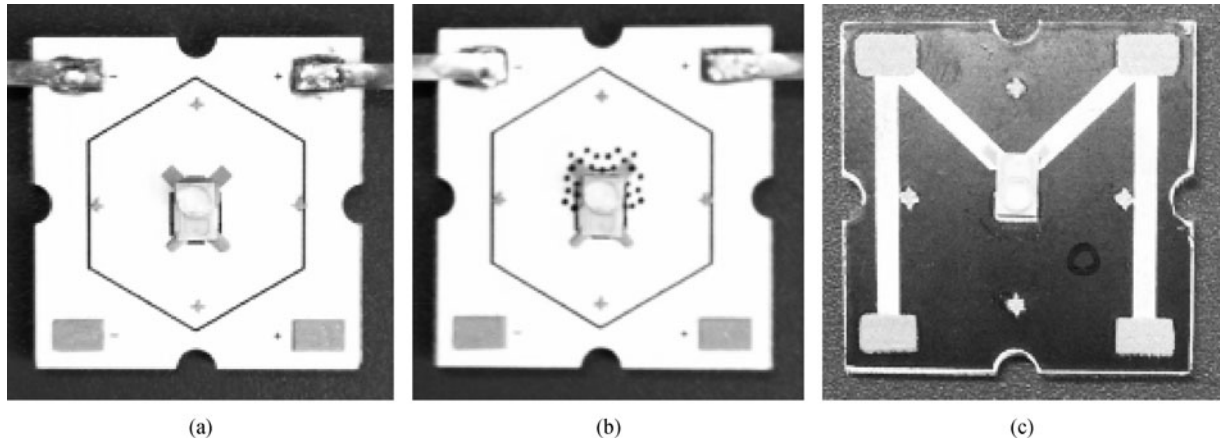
One-chip mounted LED package test boards. (a) Conventional FR-4 PCB; (b) thermal-via PCB; (c) ceramic-metal PCB
